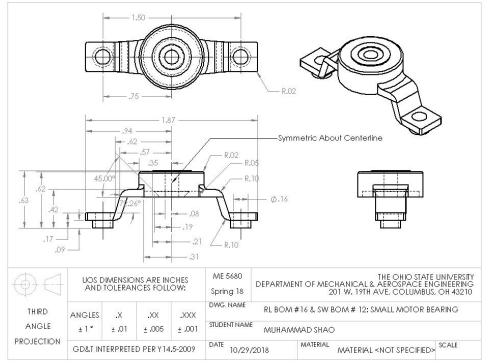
Detailed part drawing of "Small Motor Bearing" RL BOM # 16 & SW BOM # 12.
